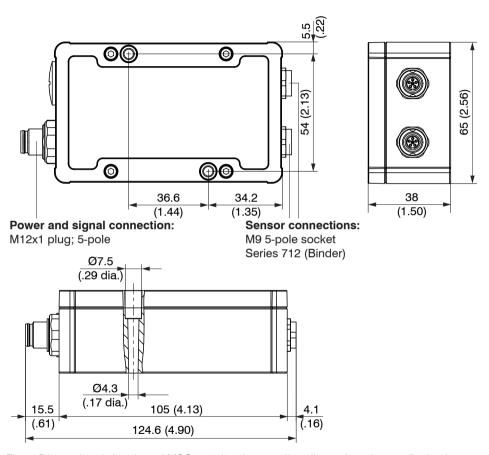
Dimensional drawing of MSC7802(010) controller, dimensions in mm (inches)
